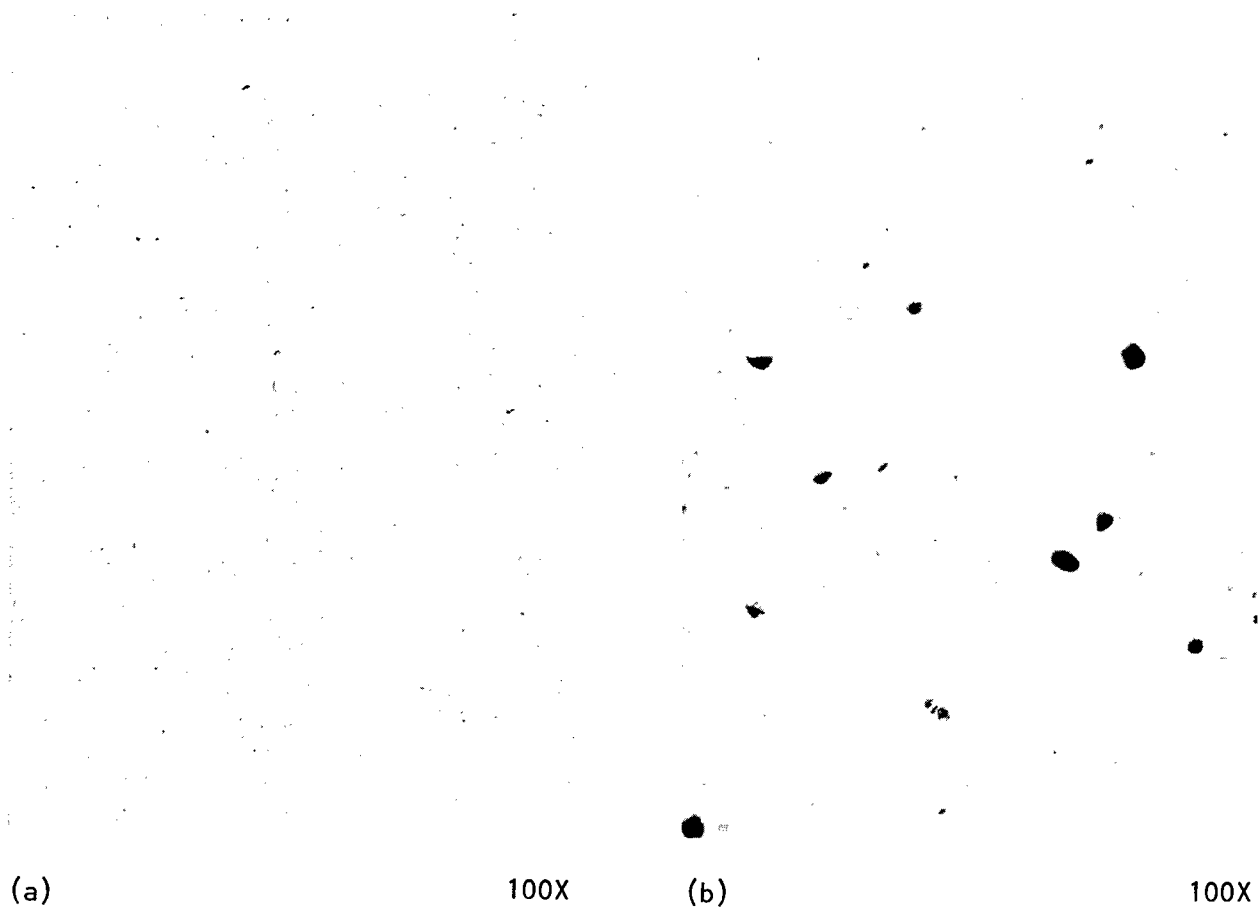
Residual Porosity in the Gear Forging (a) Polished Section from the Forging Top Where Complete Die Fill Was Achieved; (b) Section from the Constrained End of the Gear Section Where Die Fill Was Incomplete.
